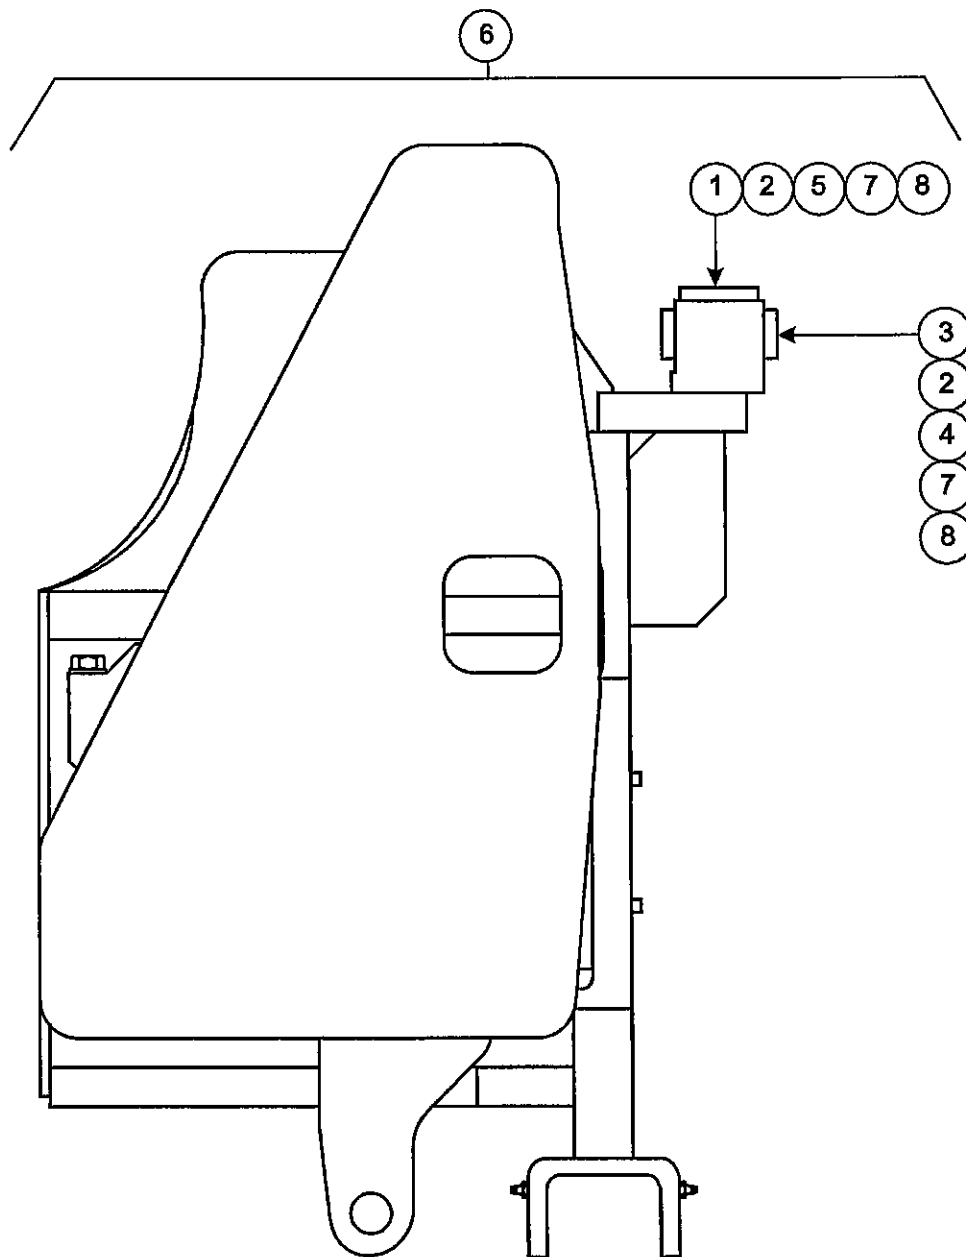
Shift Cylinder Sub-Assembly, PS9
